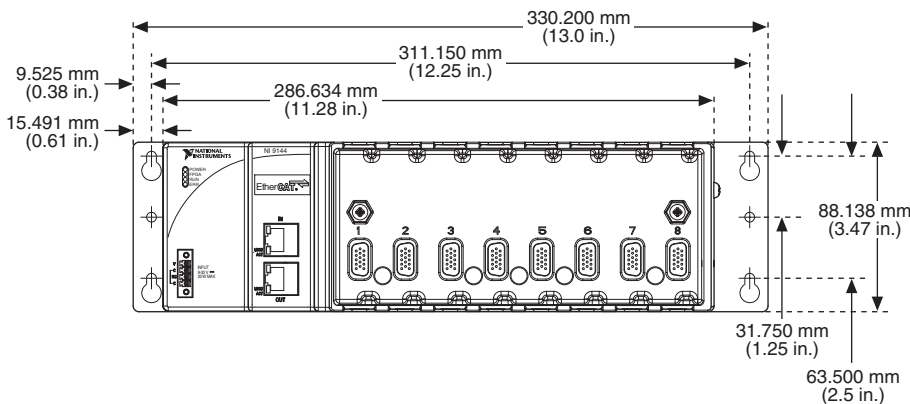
Dimensions of NI 9144 Chassis with Panel Mount Accessory Installed
